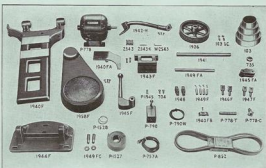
Pedestal Motor Drive Parts for Lathes.
